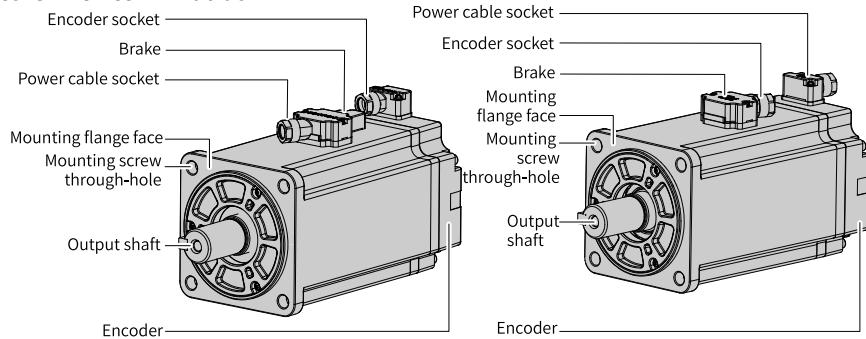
Components of motors with terminal box (left: front outlet; right: rear outlet)
